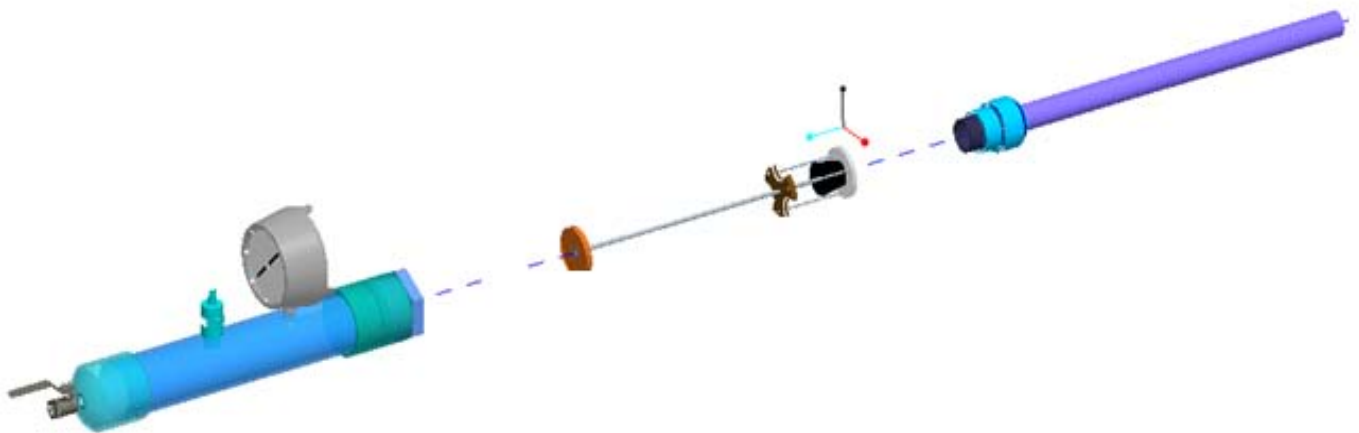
Gun, Valve Assembly and Barrel (Exploded View)
